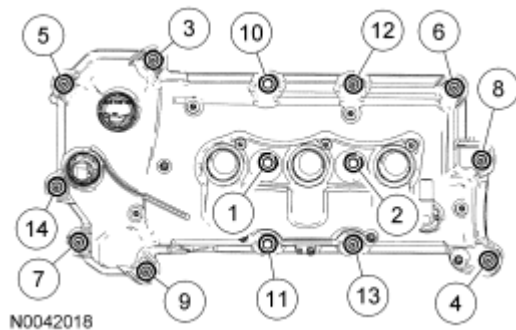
Identifying Tightening Sequence Of Valve Cover Bolts
